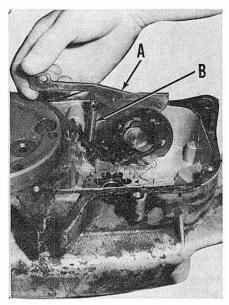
Arrangement of shift ratchet arm (A) and spring (B). Spring must be hooked on arm after installation of left case half.
